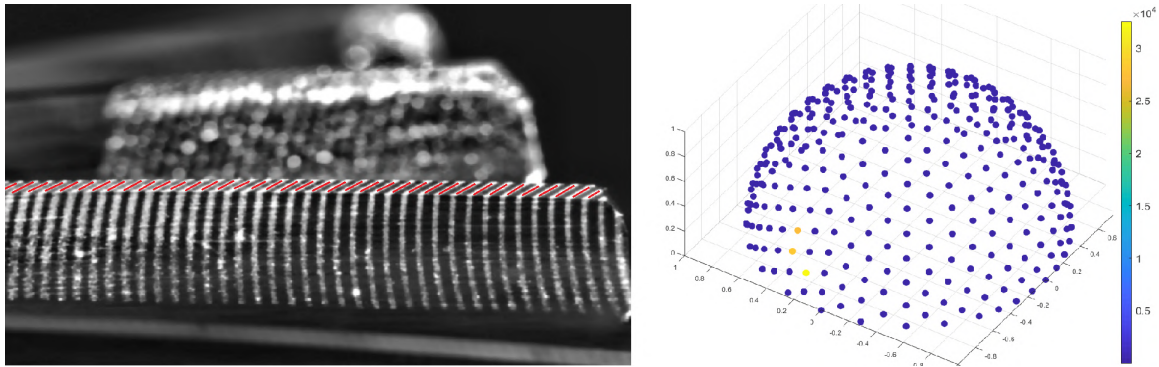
Gear axis calibration. Left: extracted points belonging to the cylinder surface. Right: spherical axis accumulator, all directions but three collected zero inliers.
